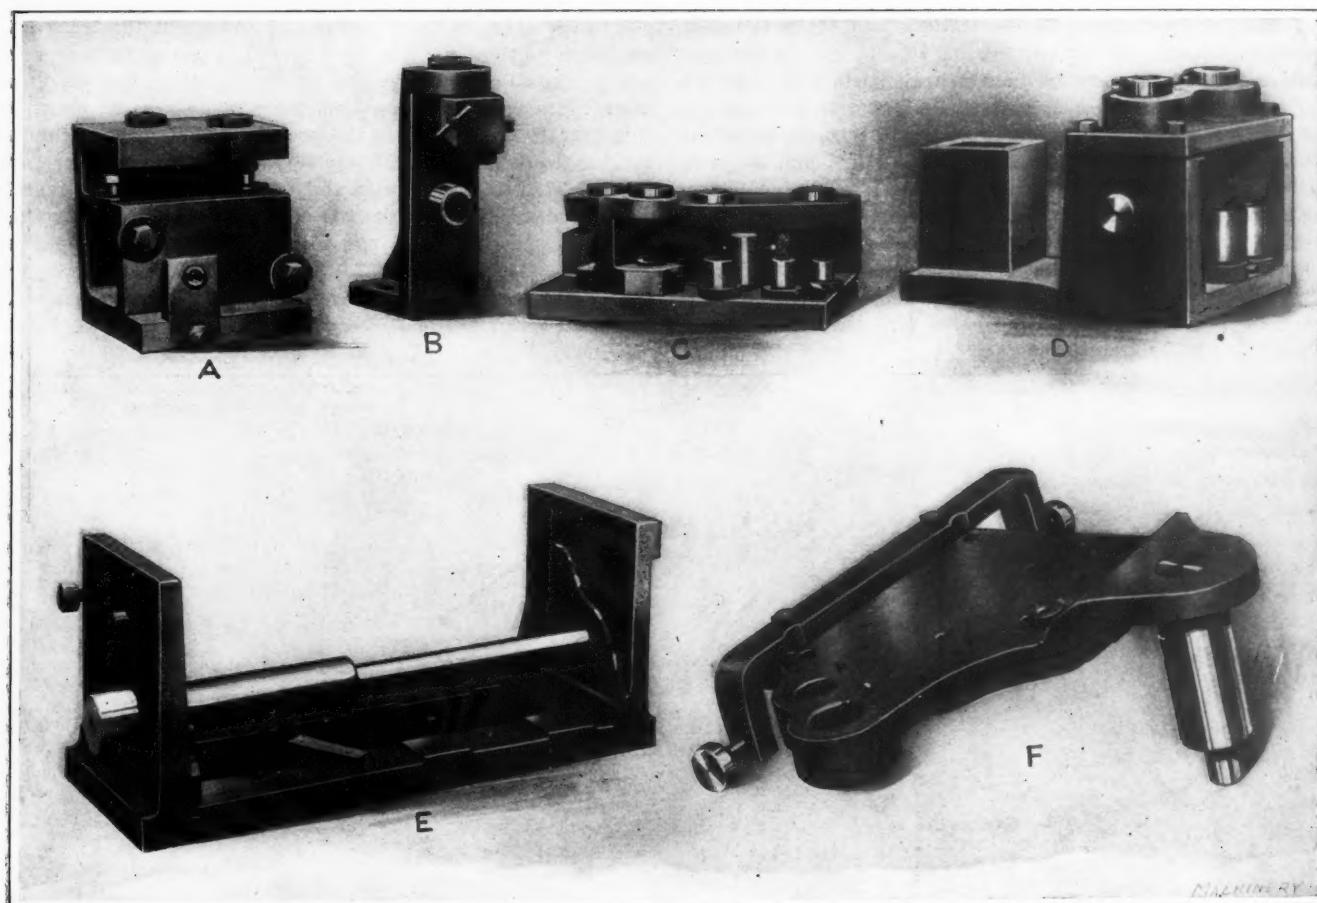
A, Drill Jig for Index Segment Bracket; B, Drill and Facing Jig for Ends of Cross-slide Spider; C, Drill Jig for Index Levers; D, Drill Jig for Index Segment Bracket; E, Drill Jig for Cam-shaft Gear-box; F, Drill Jig for Cam-shaft Gear-box Bolt Holes
